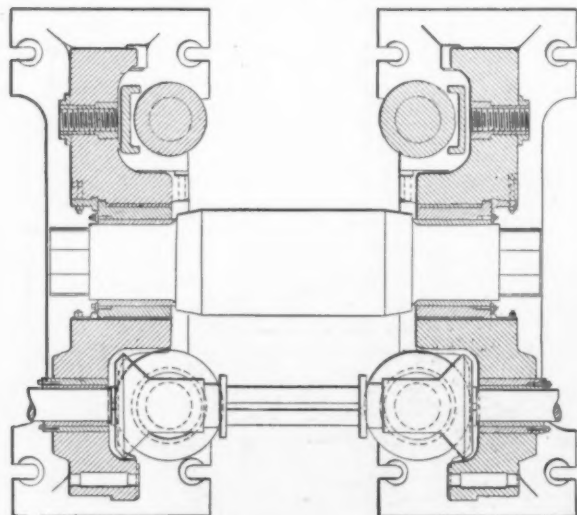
Plan Sections of the Housings, the Upper Part Being Taken through the Vertical Rolls and the Lower Part through the Center of the Driving Shaft.
